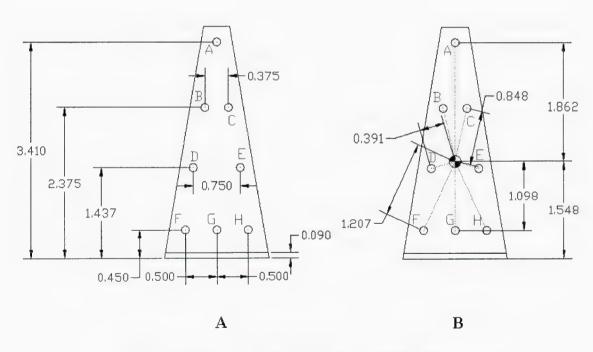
Roof Fitting Bracket, Dimensions
